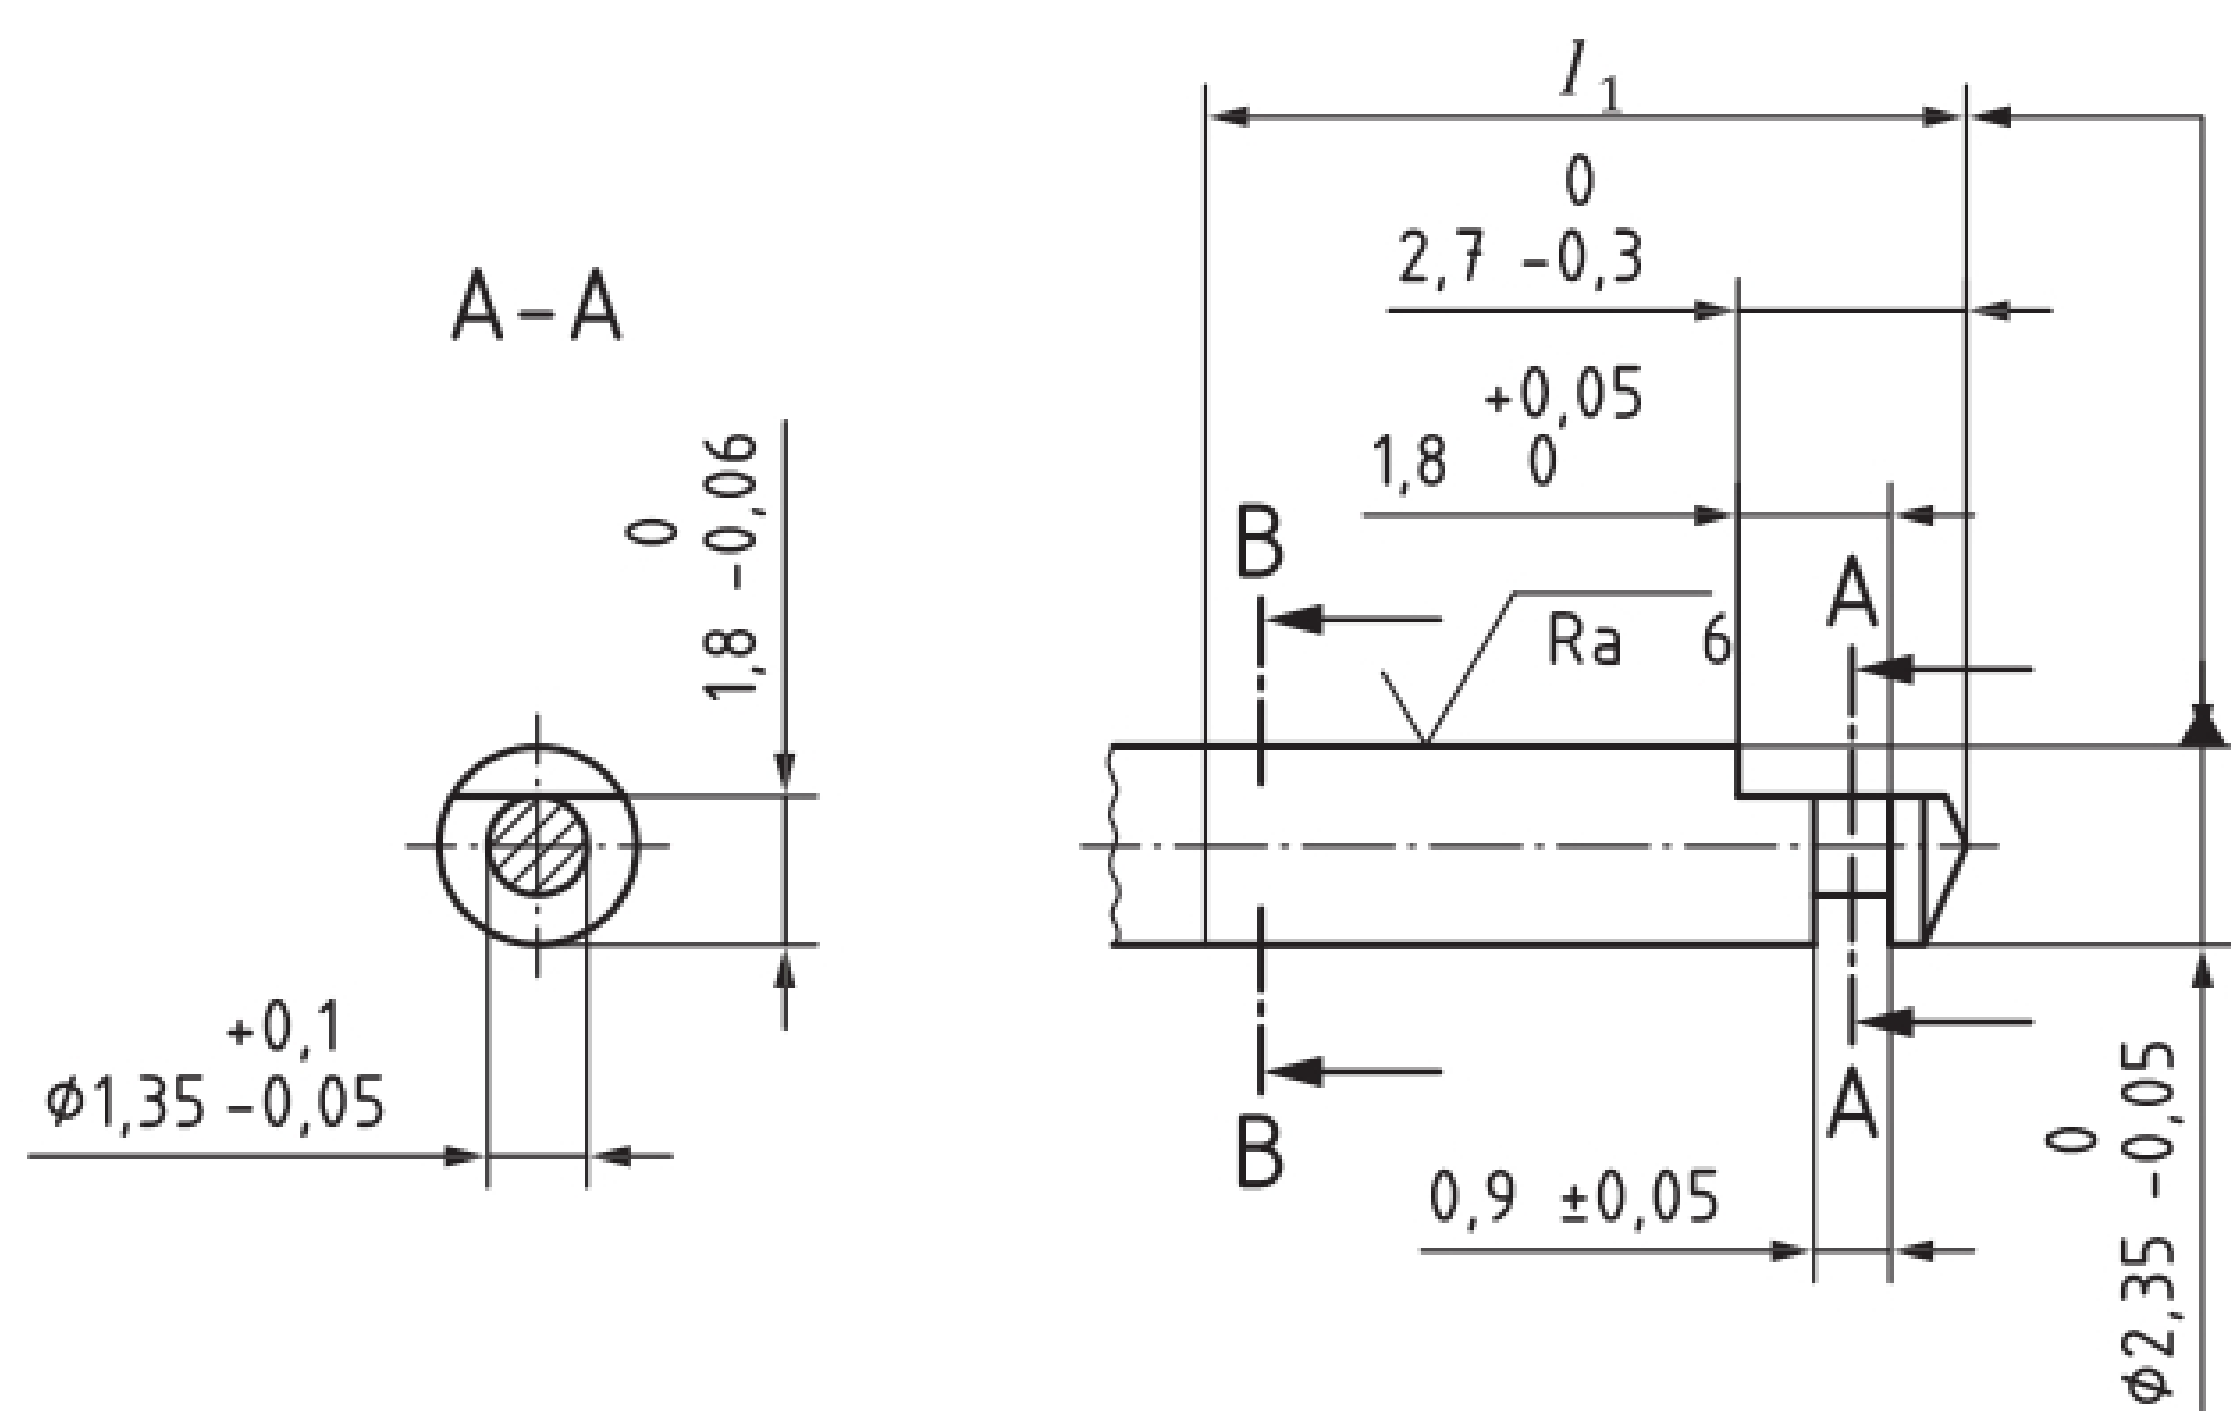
Dimensions, tolerances and surface roughness for Type 1 plastic shank
